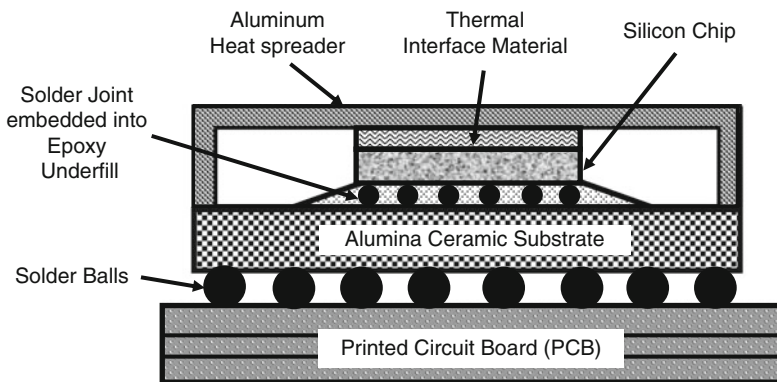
Schematic illustration of a typical ceramic ball grid array package assembly
